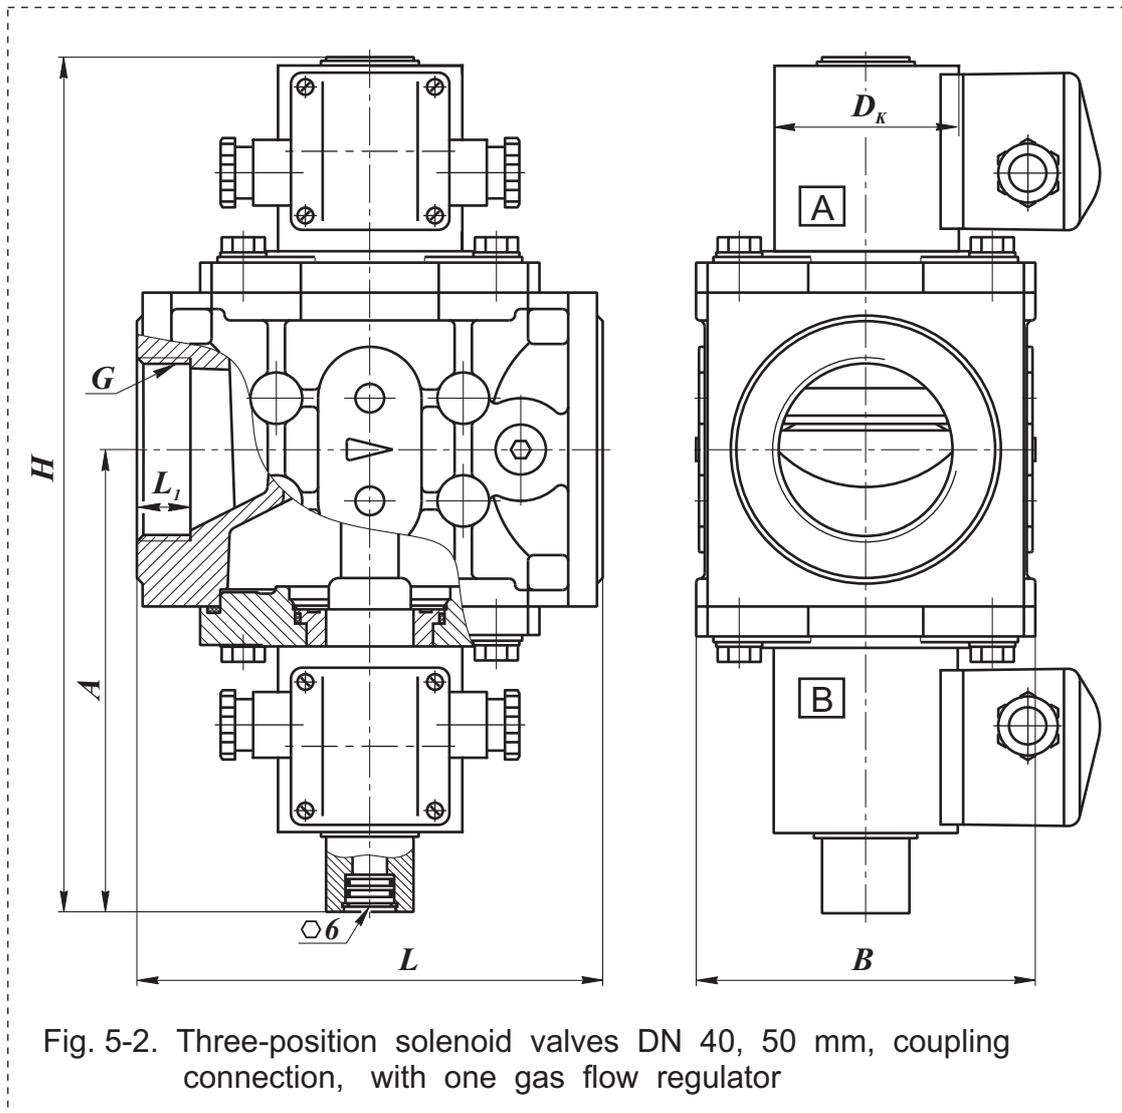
Three-position solenoid valves DN 40, 50 mm, coupling connection, with one gas flow regulator
